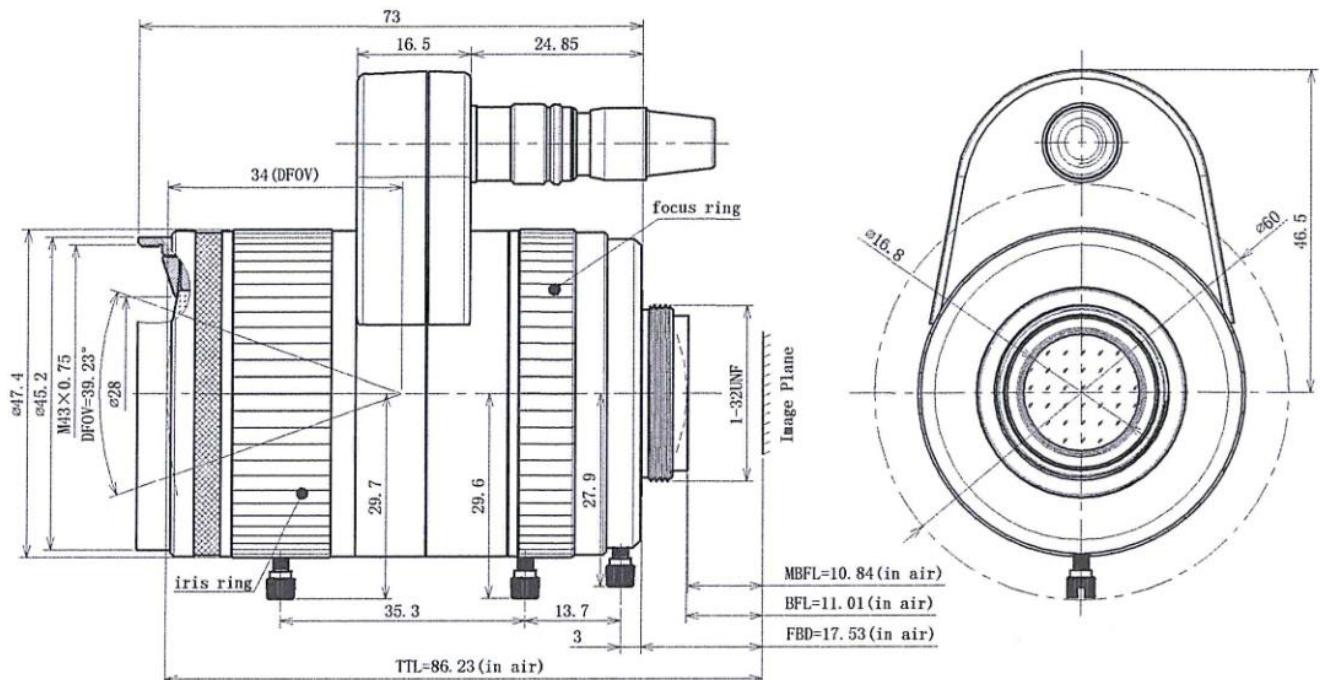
Mechanical drawing of the ELM-25-2.8-18-C
